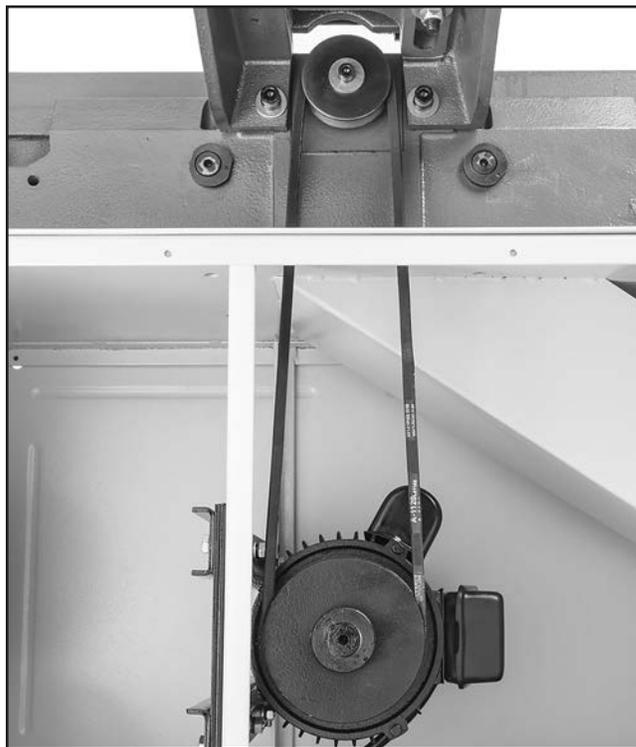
Example of belt installed on cutterhead and motor pulleys.
